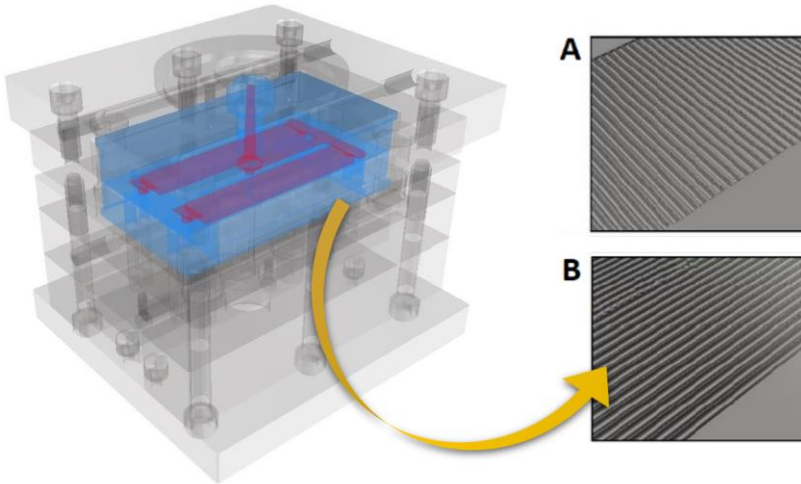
The injection moulding tool and its microstructured cavity: A – perpendicular, B – parallel to the flow front.
